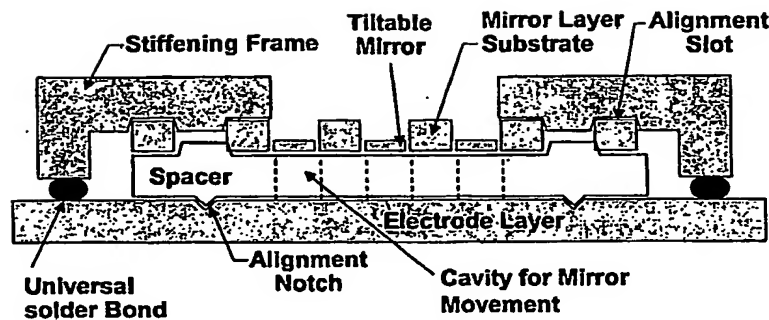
Assembly of SOI layers with universal solder joints for optical MEMS.
